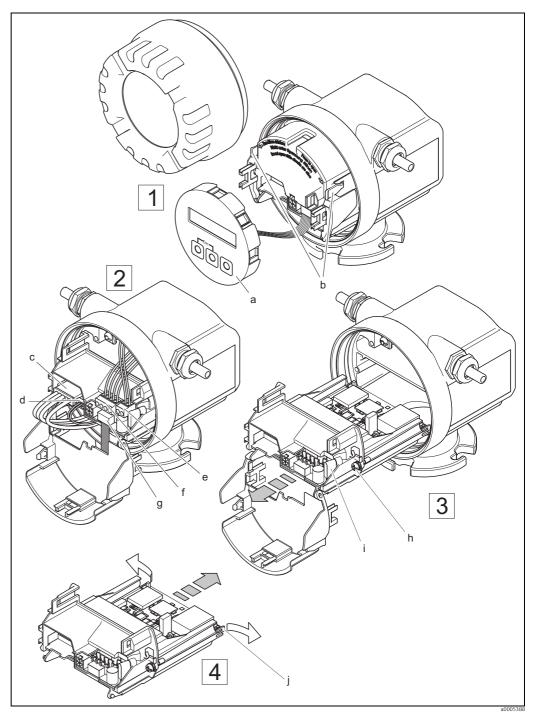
$Field\ housing: removing\ and\ installing\ printed\ circuit\ boards$
